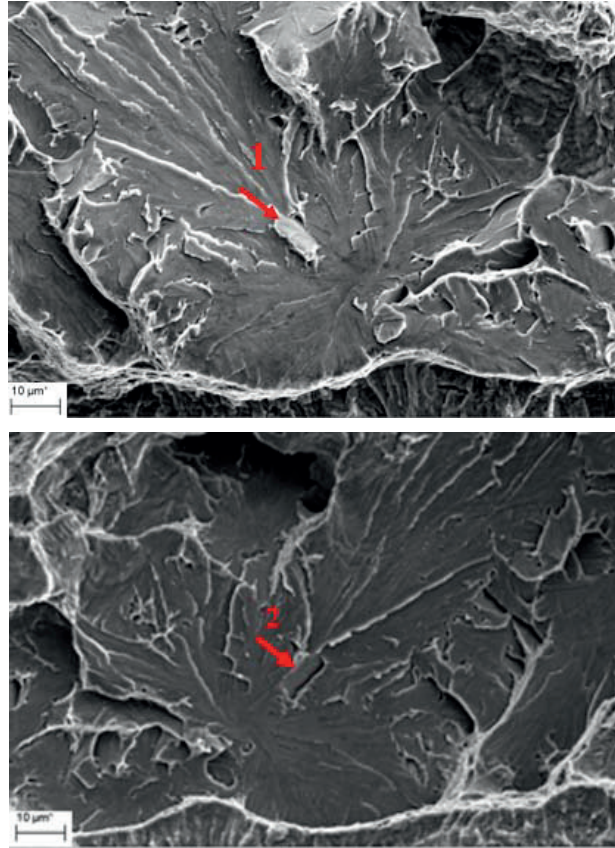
Fracture surface of the specimen tested at 0°C.
